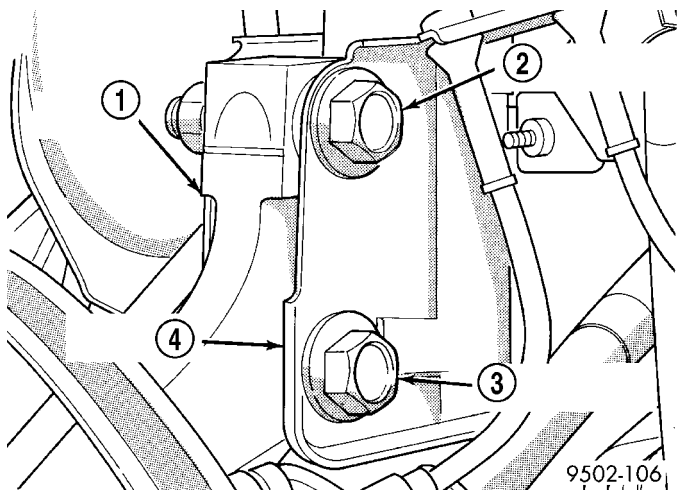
Correctly Installed Eccentric Attaching Bolt
